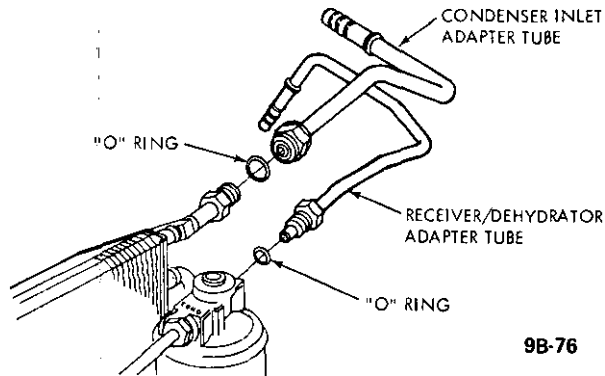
B-102 Condenser • Receiver • Dehydrator O-Rings. GT
